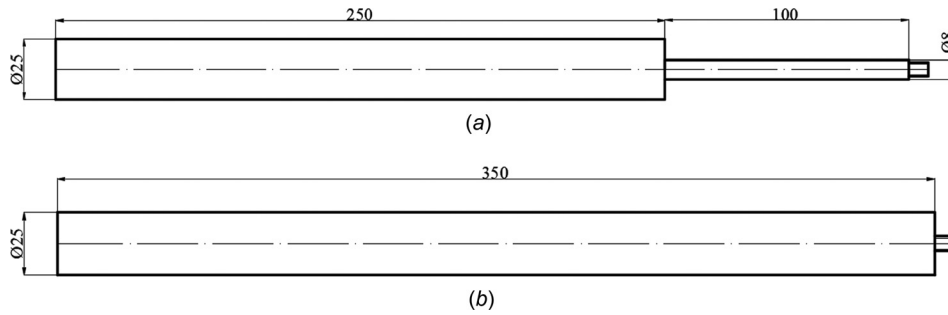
Test tubes: (a) flexible tube and (b) fixed tube
